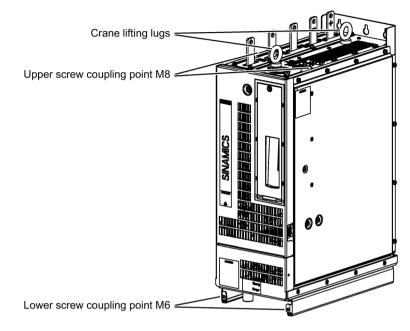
Crane lifting lugs / screw coupling points for mechanical support
